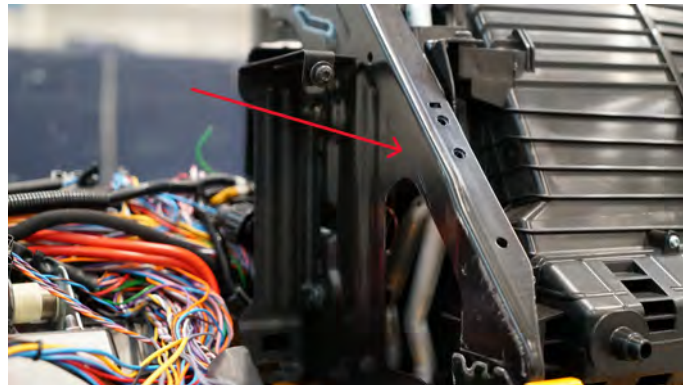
Wall Next to ECU CUV3(red arrow)
